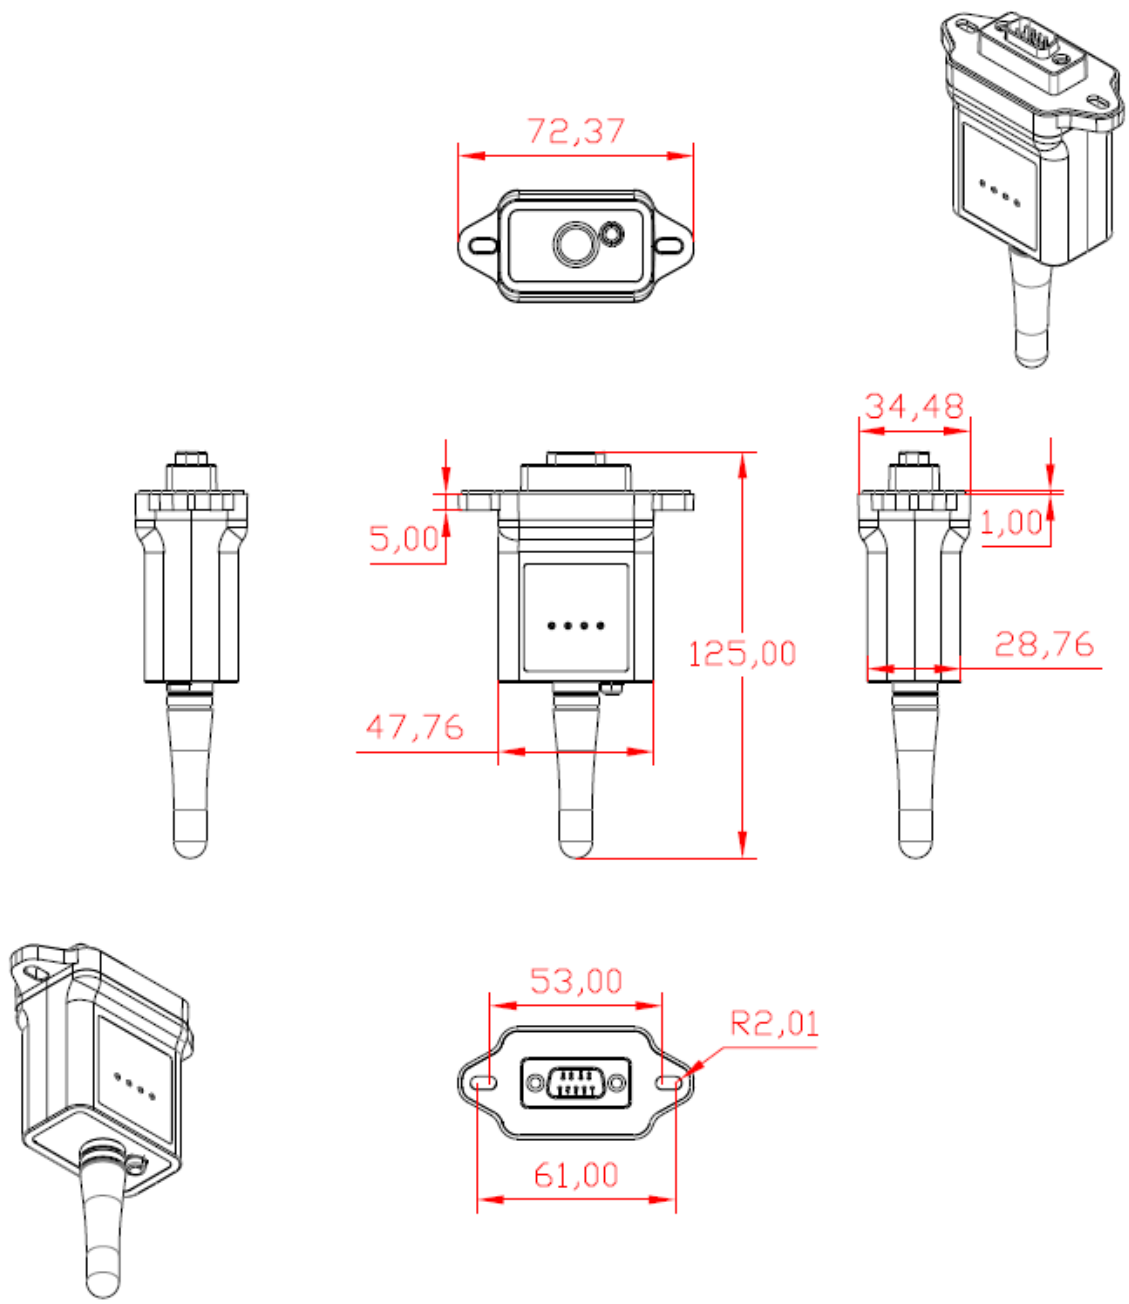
Solar Plug-SWB1-23/-24/-25 Mechanical Dimensions
